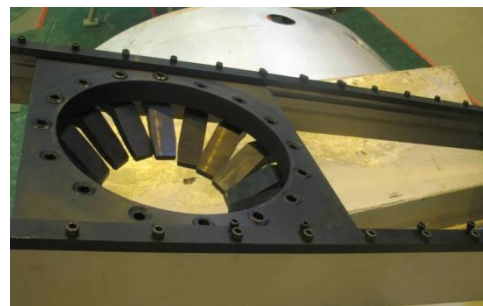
Schematic drawing of 3-D with flange automation welding tool
